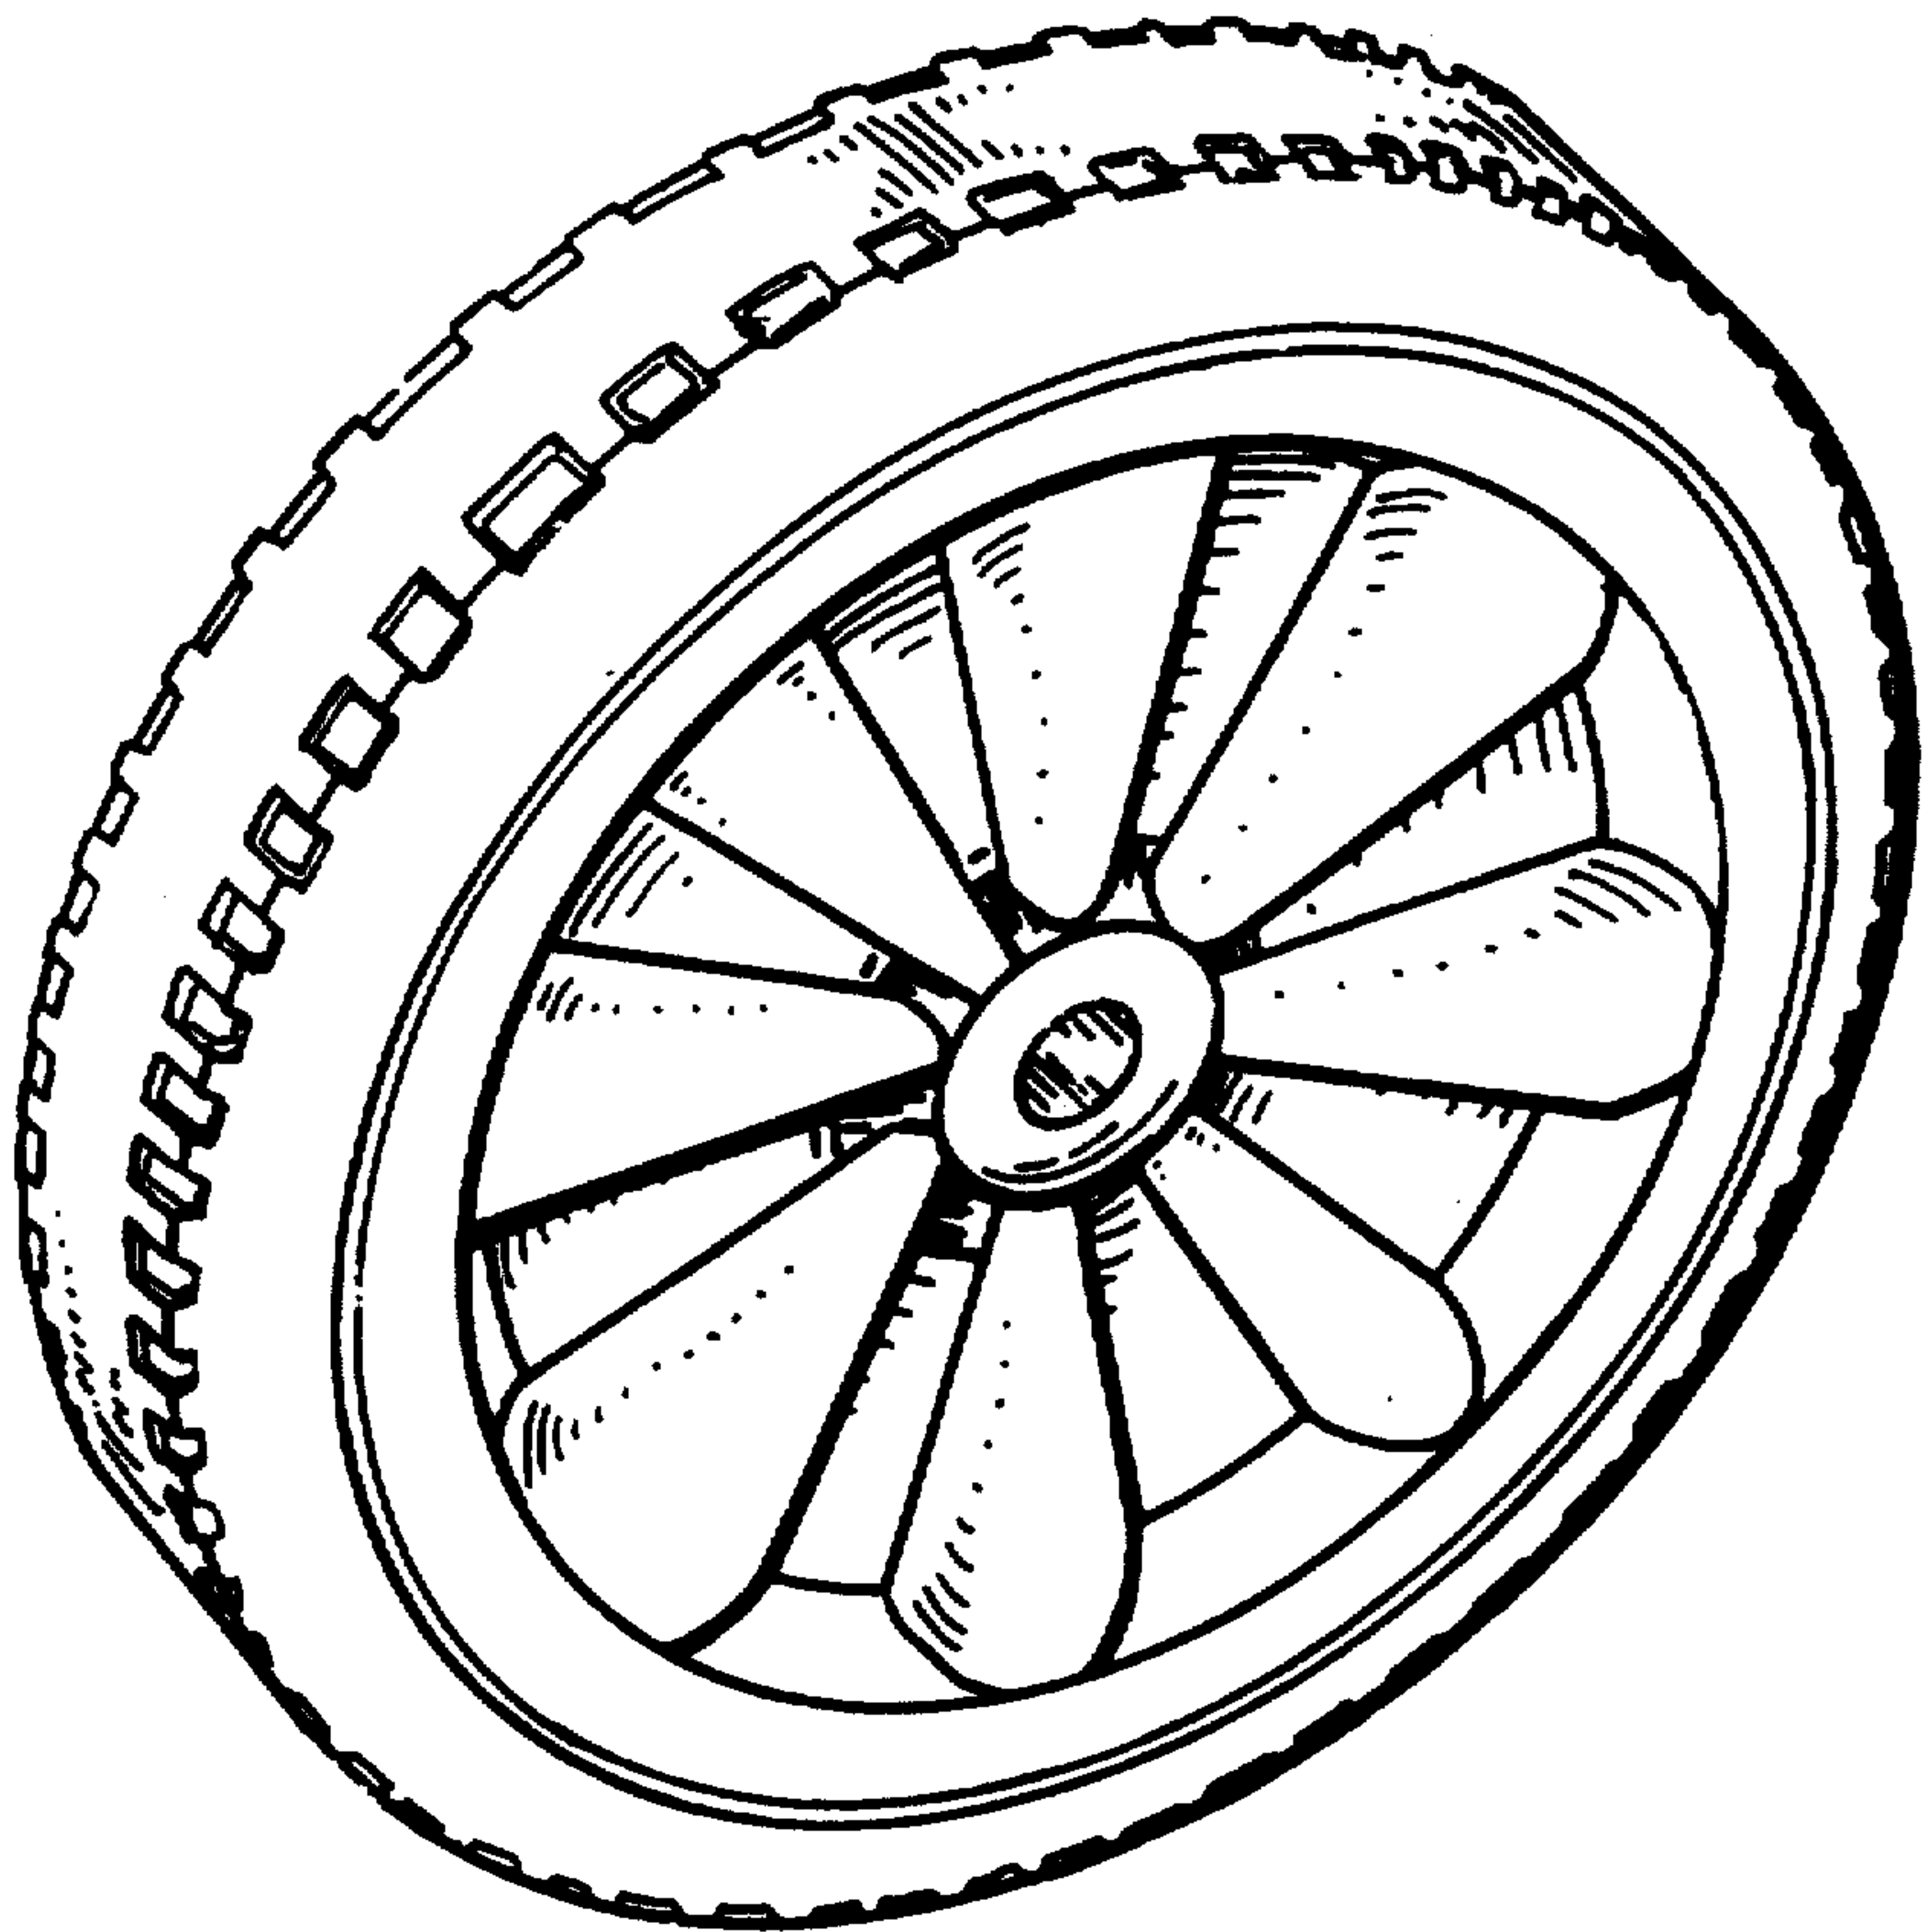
is an isometric view of a blow molded wheel showing my new design;
